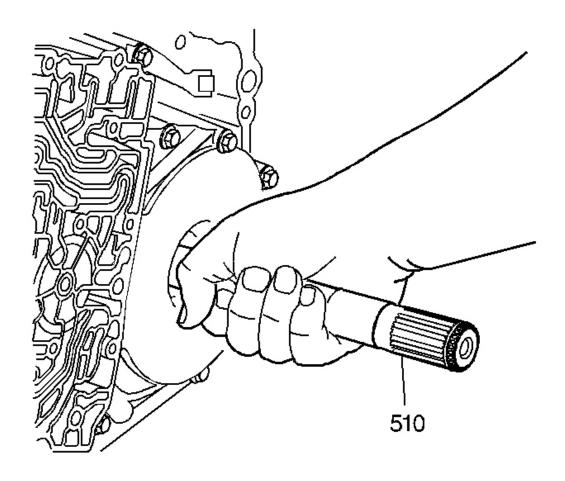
Removing/Installing Output Shaft Courtesy of GENERAL MOTORS CORP.
